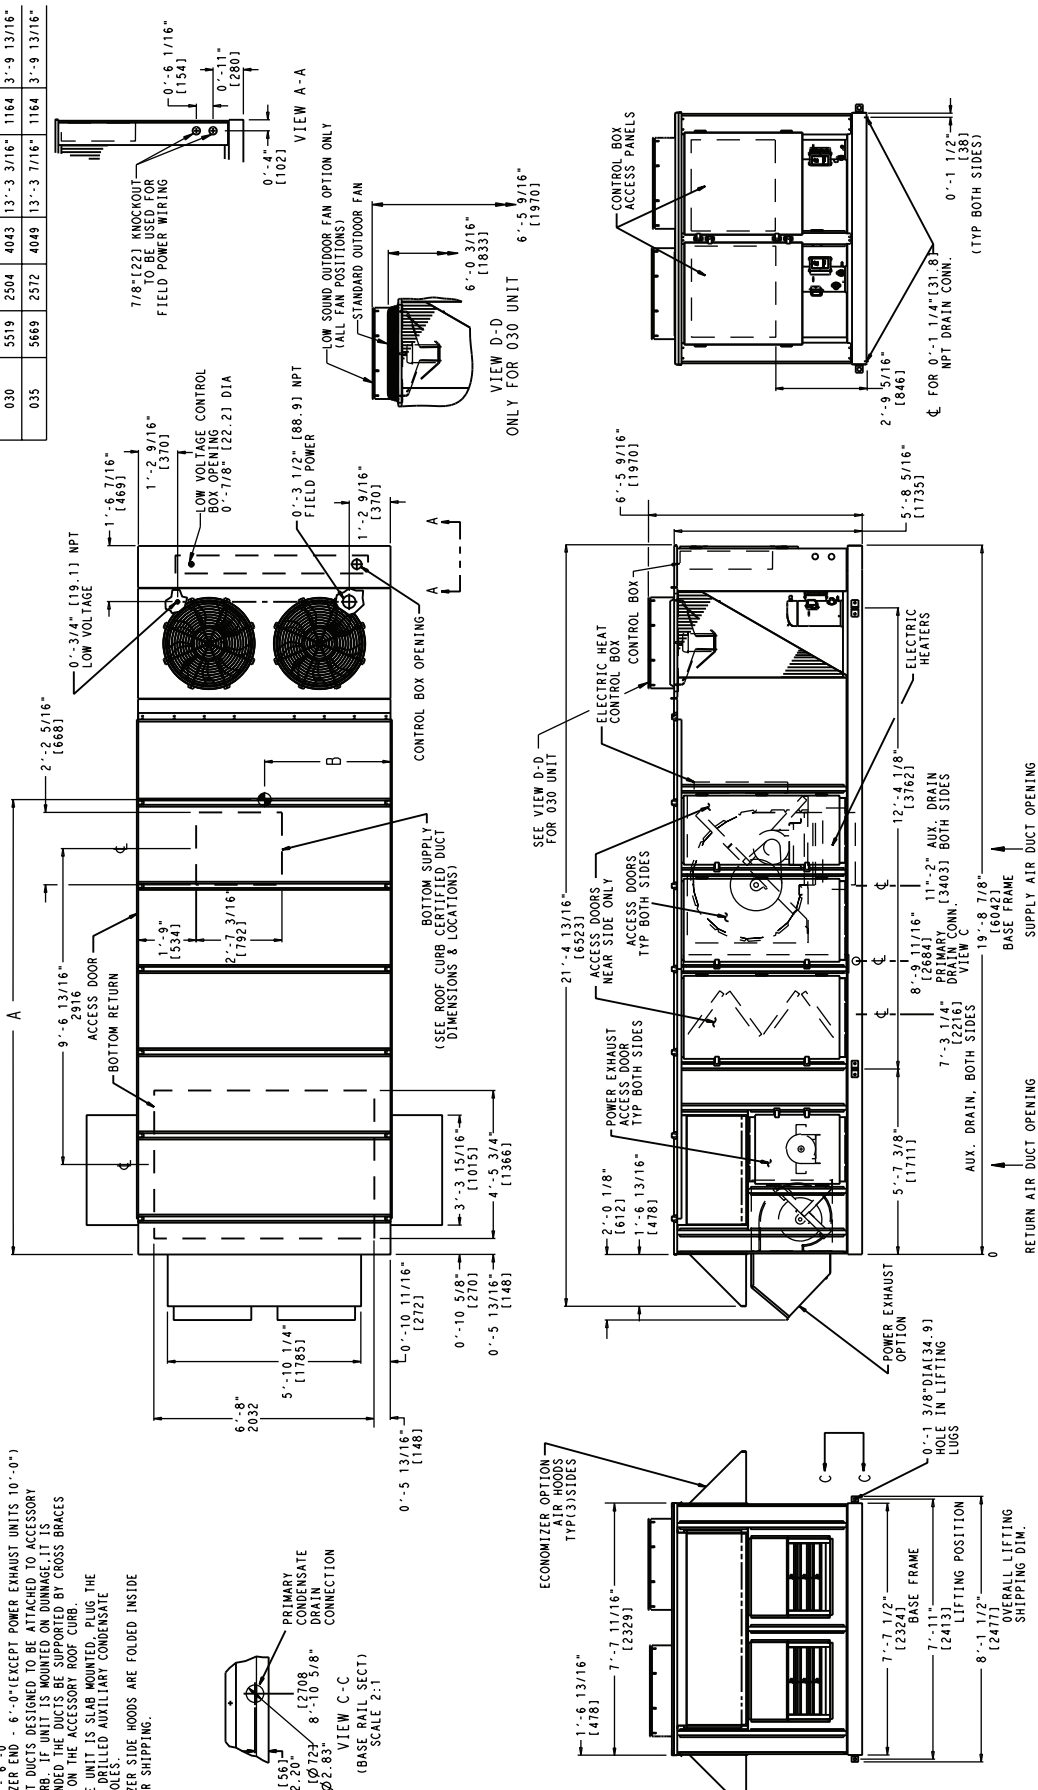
Base Unit Dimensional Drawing — 50P2, P3030, 035 (Standard Chassis Unit Shown)
